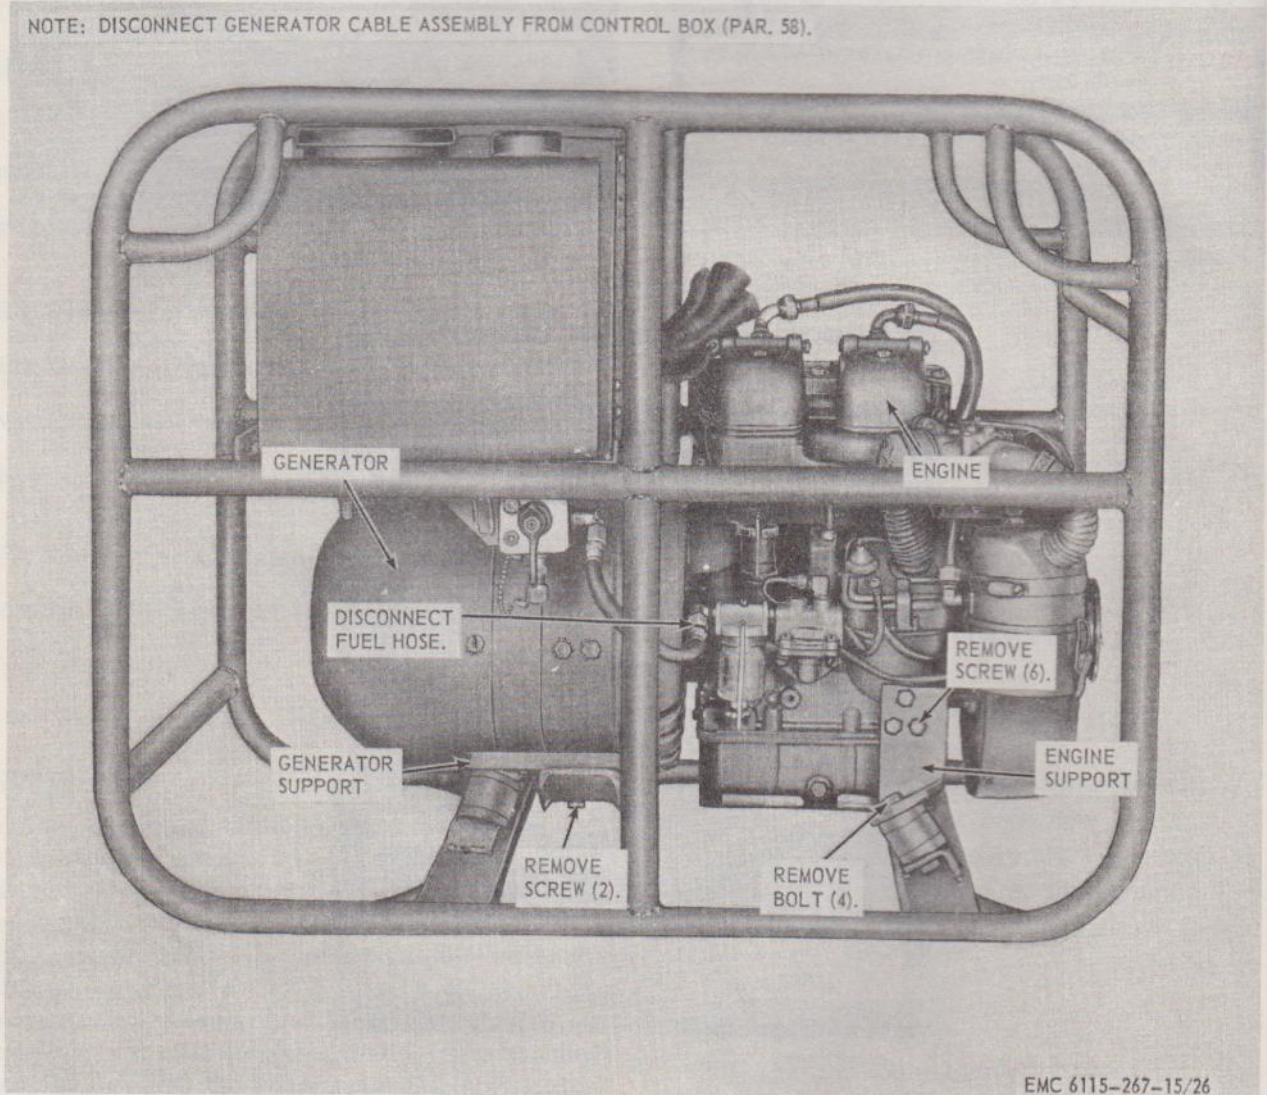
Engine-generator assembly, generator support, and engine supports—removal and installation.
